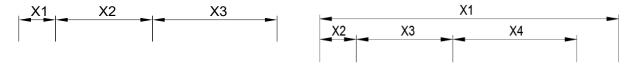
Examples of assigning drawing codes to dimensions with chain and group dimensioning
